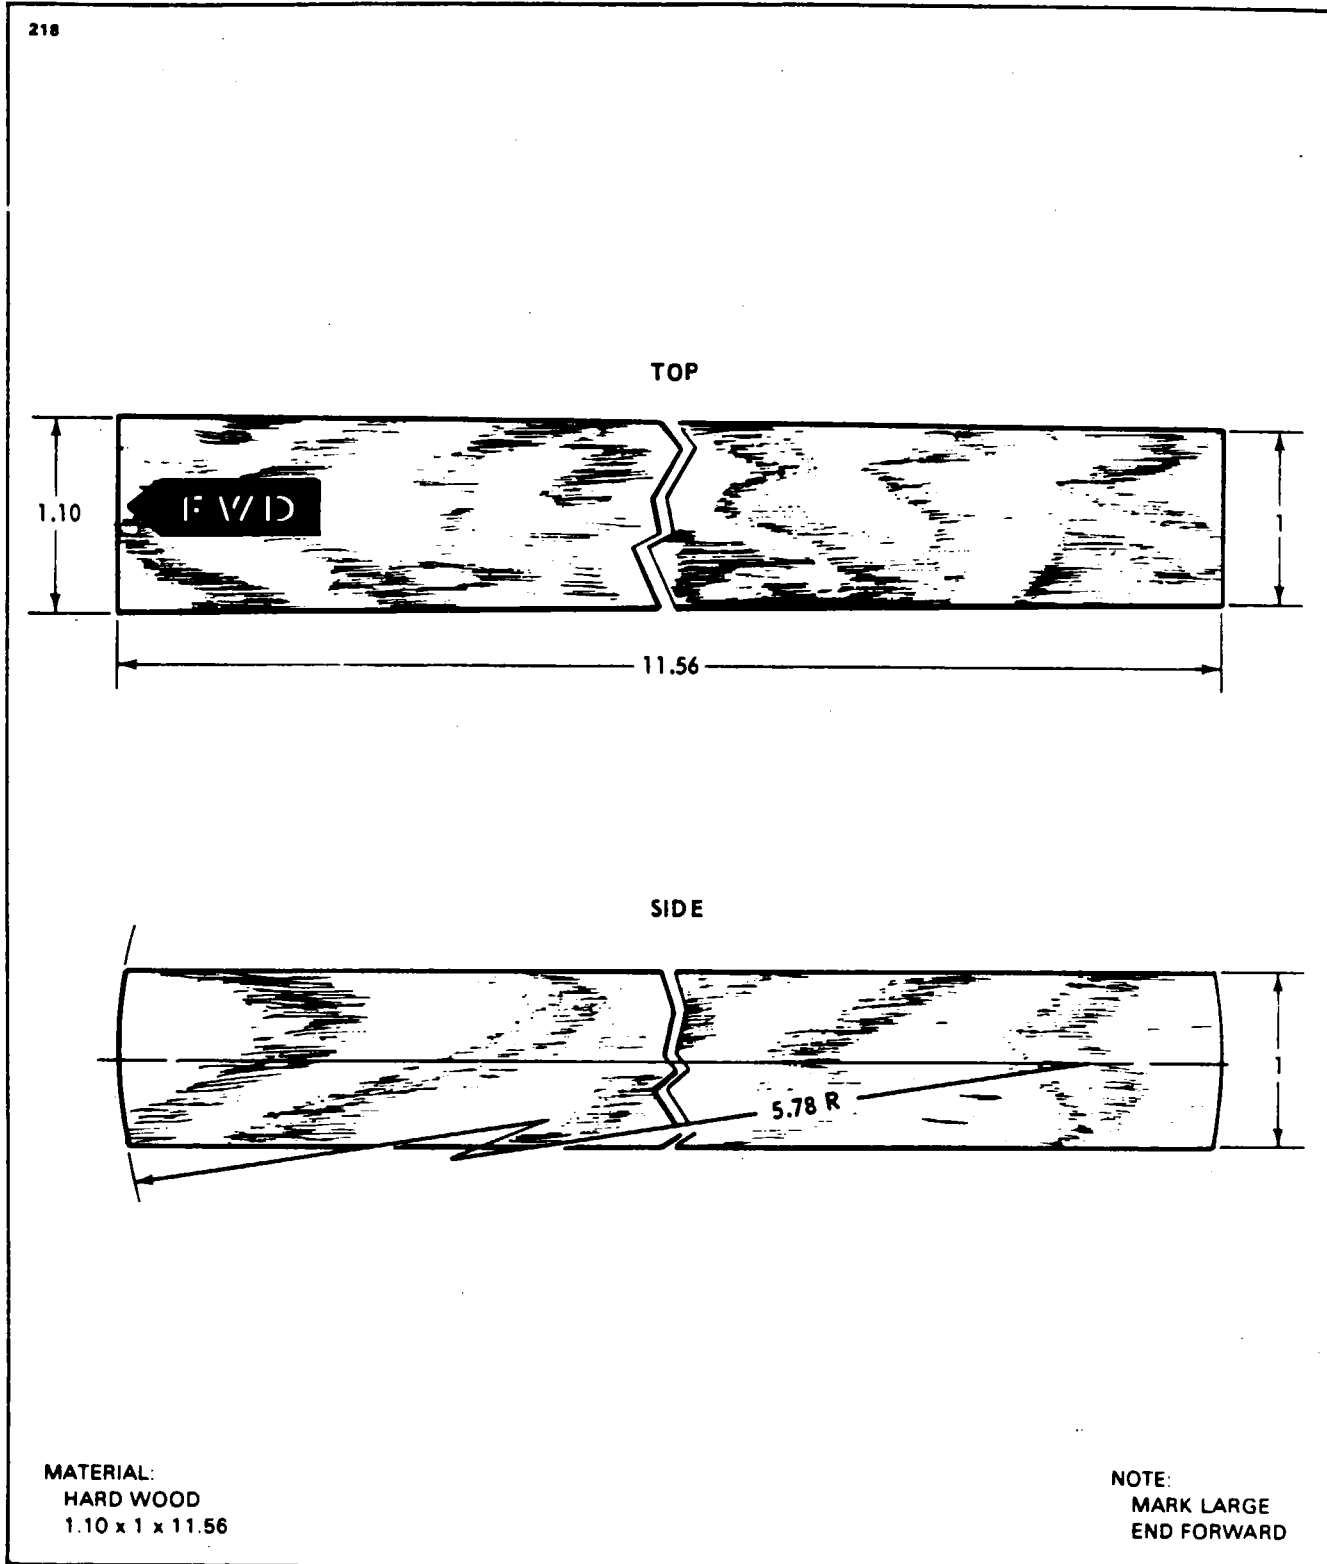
Fabricated Tool, Checking Main Gear Toe-In Adjustment
